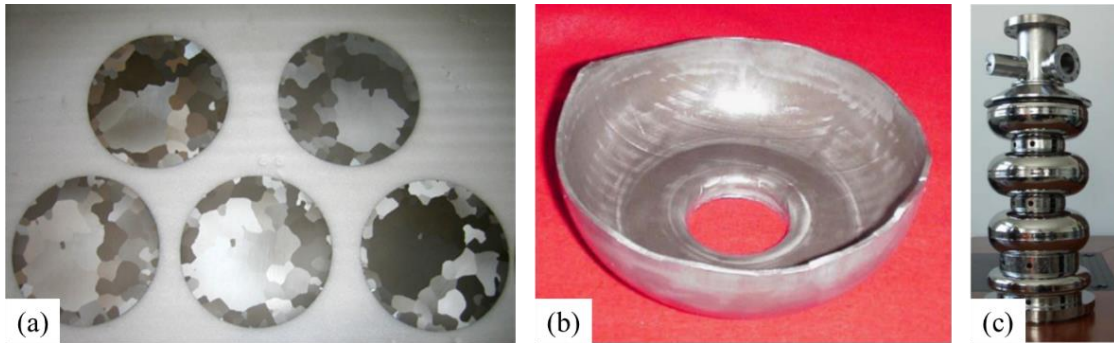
Large-grain niobium (a) disks produced at Tokyo Denkai, (b) half-cell deep drawn at JLab with earing defects and (c) 3.5-cell 1.3 GHz cavity manufactured at PKU [21], [29], [32].
